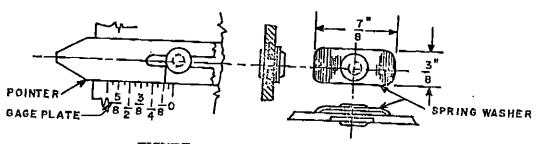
BUTT AND FILLET WELD GAGE
